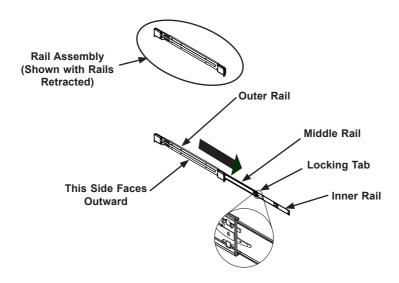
Identifying the Outer Rail, Middle Rail and Inner Rails (Left Rail Assembly Shown)
